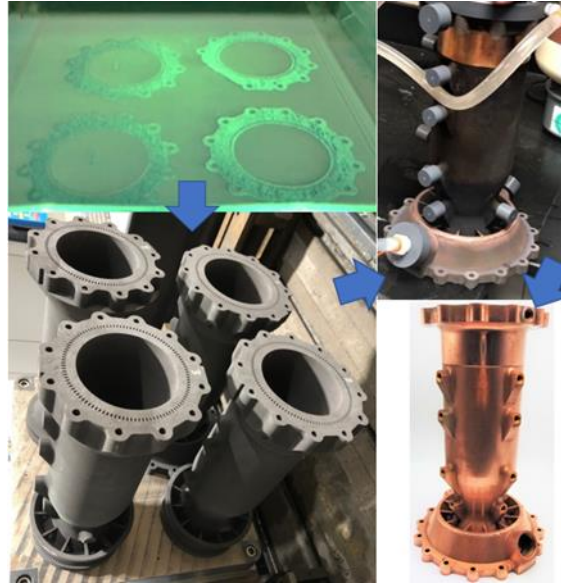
L-PBF build process, chamber powder removal/heat treatment, EDM removal/EB manifold weldment/post-process polishing, and final product of a 7k lbf class chamber.
